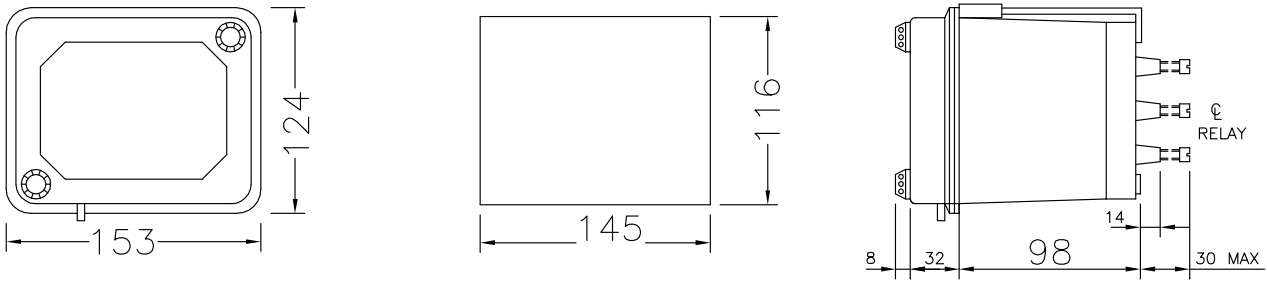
Case and panel cut-out dimensions for case 1/2N (all dimensions in mm)
